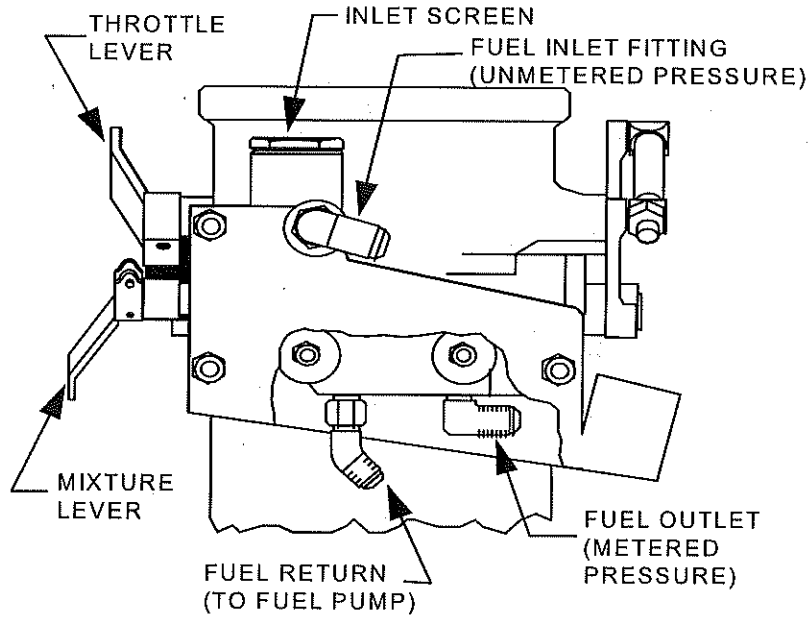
THROTTLE & CONTROL ASSEMBLY - FRONT VIEW (EXCEPT GTSIO-520-D,F,H,K,L,M,N)
